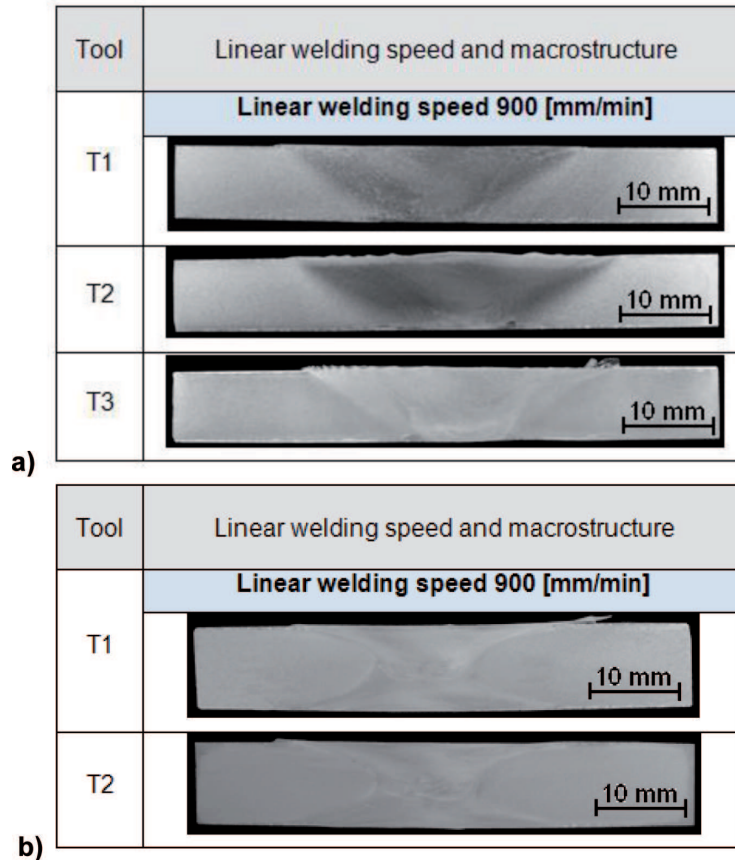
Macrostructures of FSW welded joints; a) 8 mm-thick single-sided joints, b) 10 mm-thick double-sided joints
